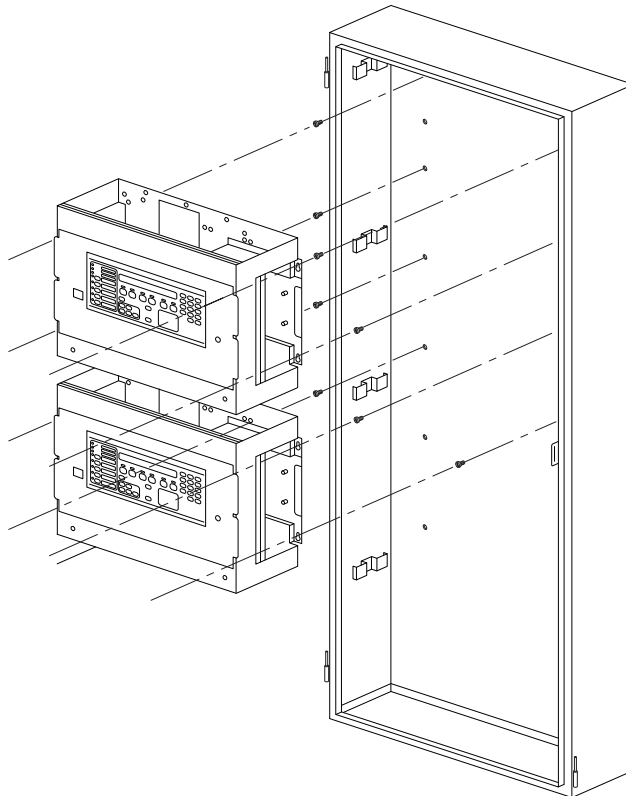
Installing the CPU Bay Assembly (4100-9121 Model Shown)
